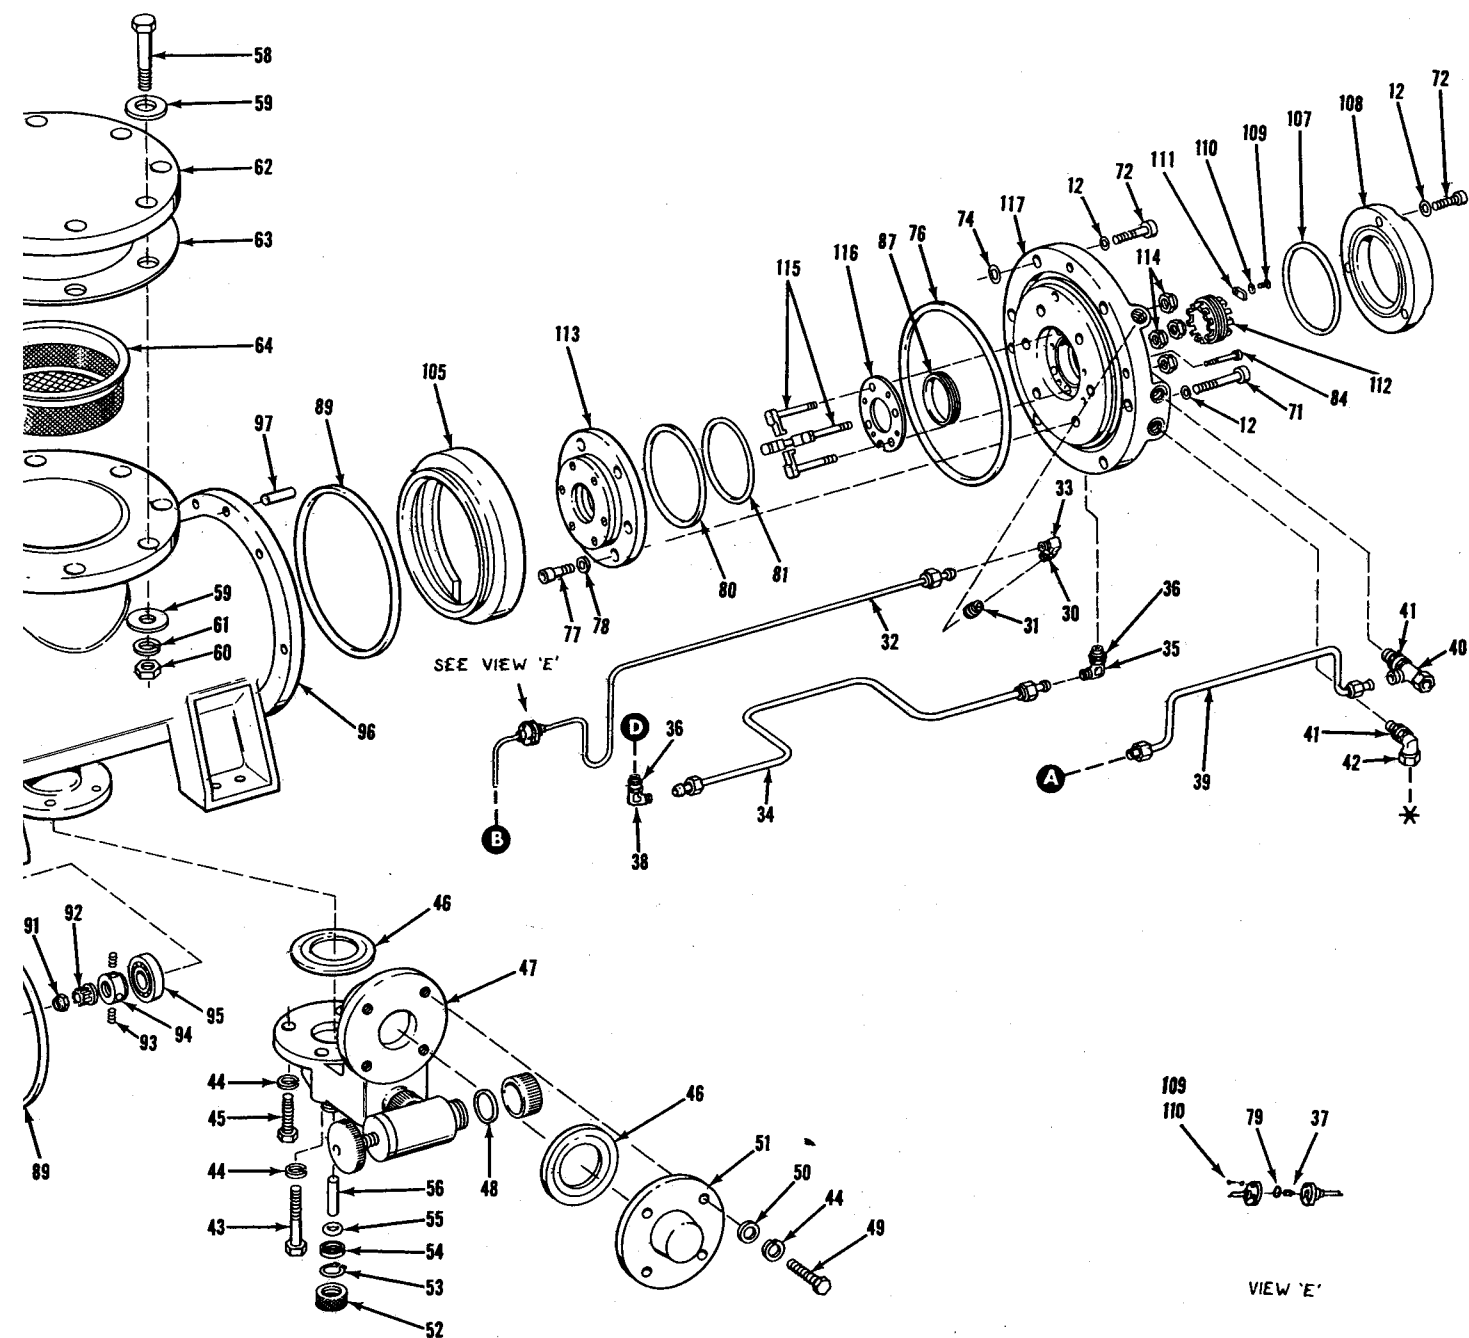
TURBO-MOLECULAR PUMP ASSEMBLY.
